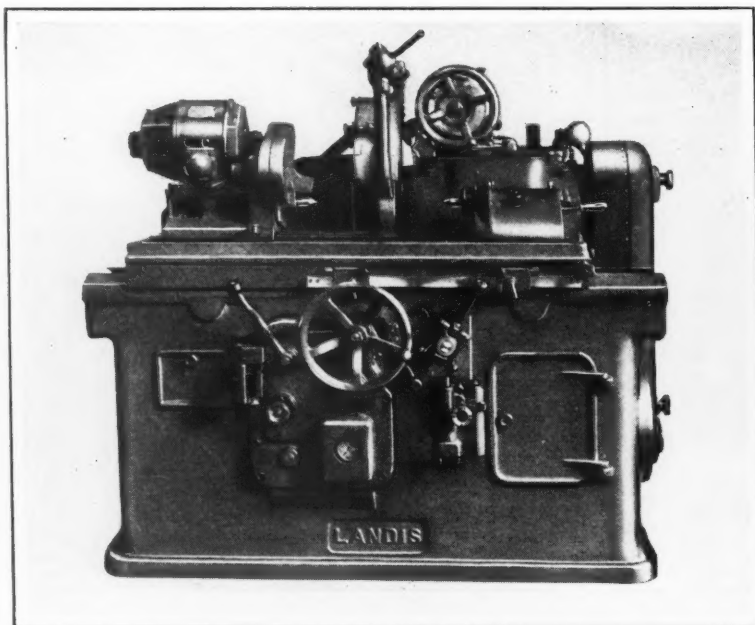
Landis Plain Hydraulic Grinder Designed for Such Parts as Axle-shafts, Pistons and Small Armatures
